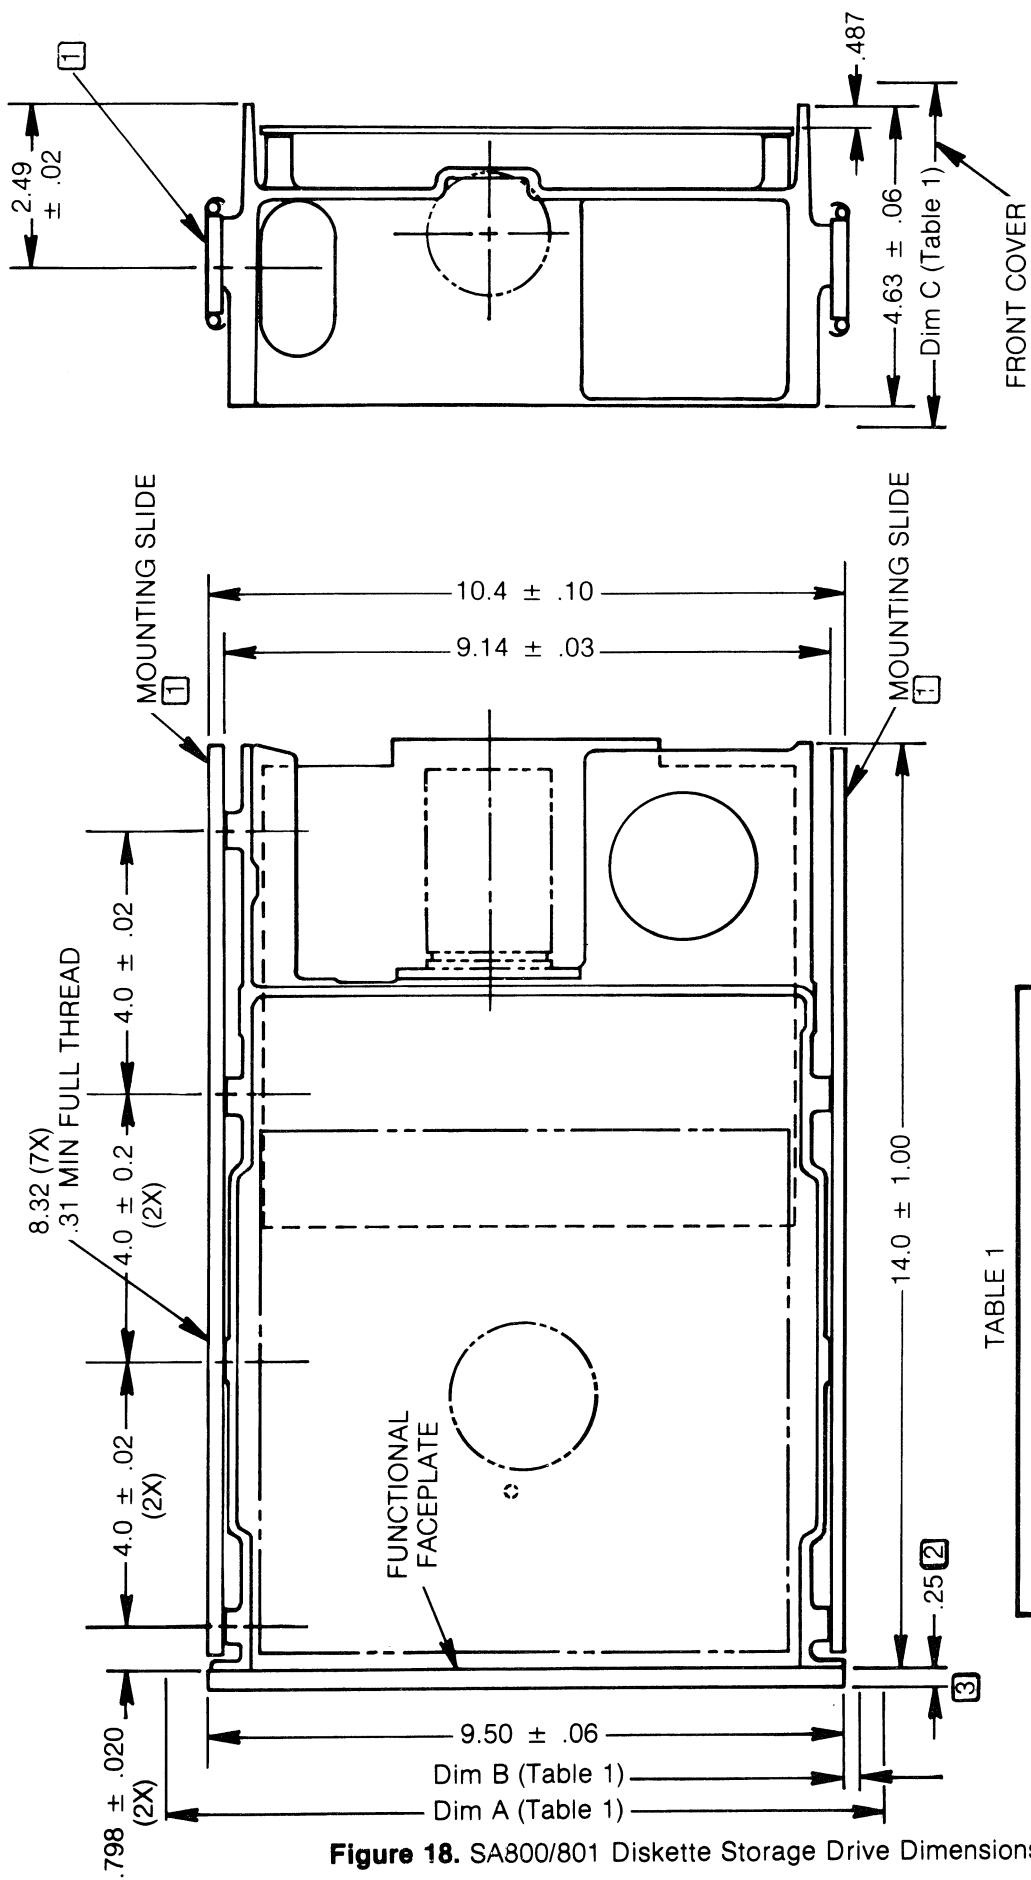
SA800/801 Diskette Storage Drive Dimensions
